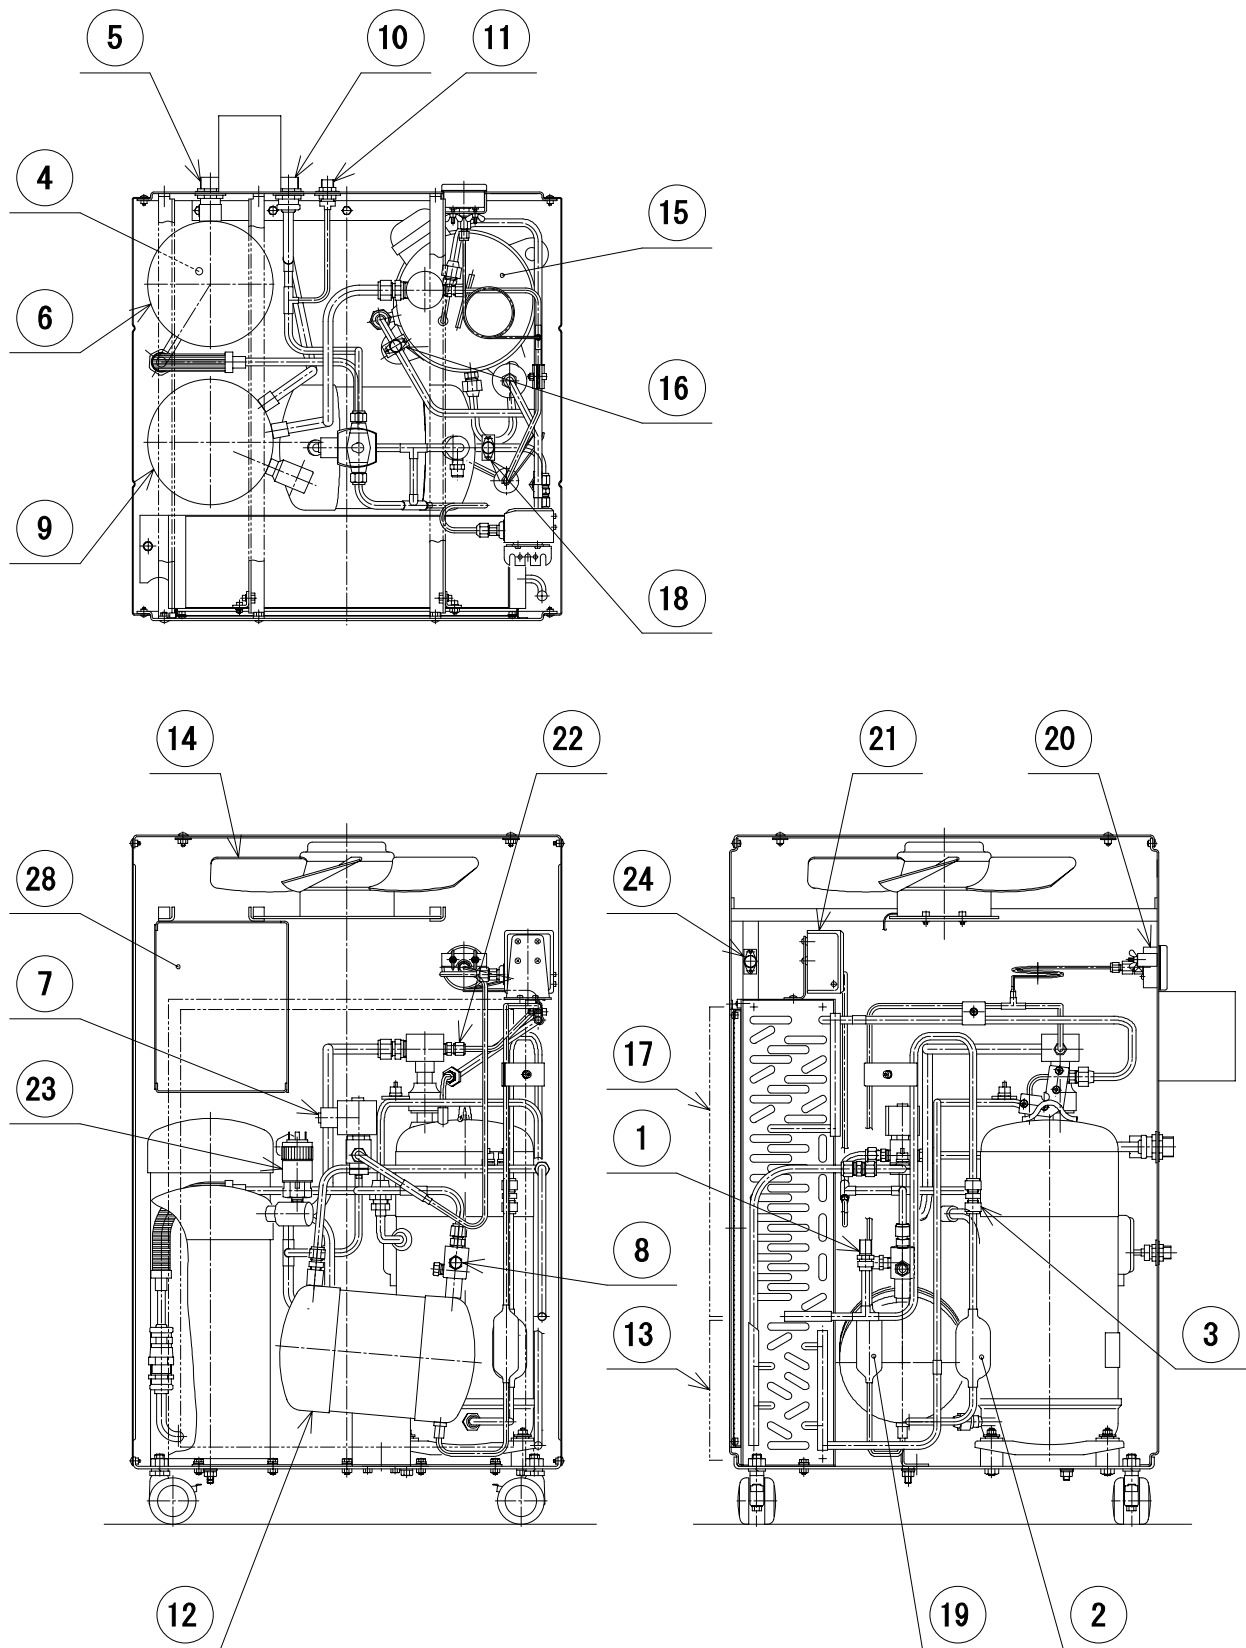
COMPONENTS OF CSA-71A COMPRESSOR UNIT
